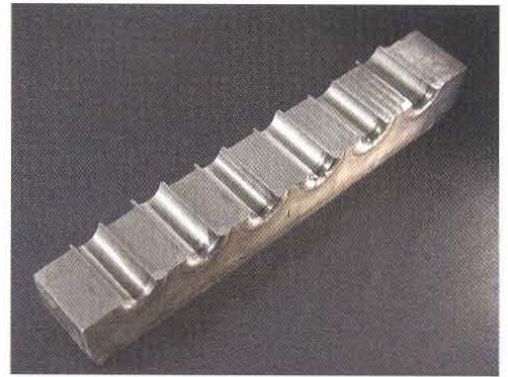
A mock-up is used for a mock-up test to simulate actual production welding situations to ensure proper tooling and techniques are selected, such as for heat exchanger tube-tubesheet joints.
